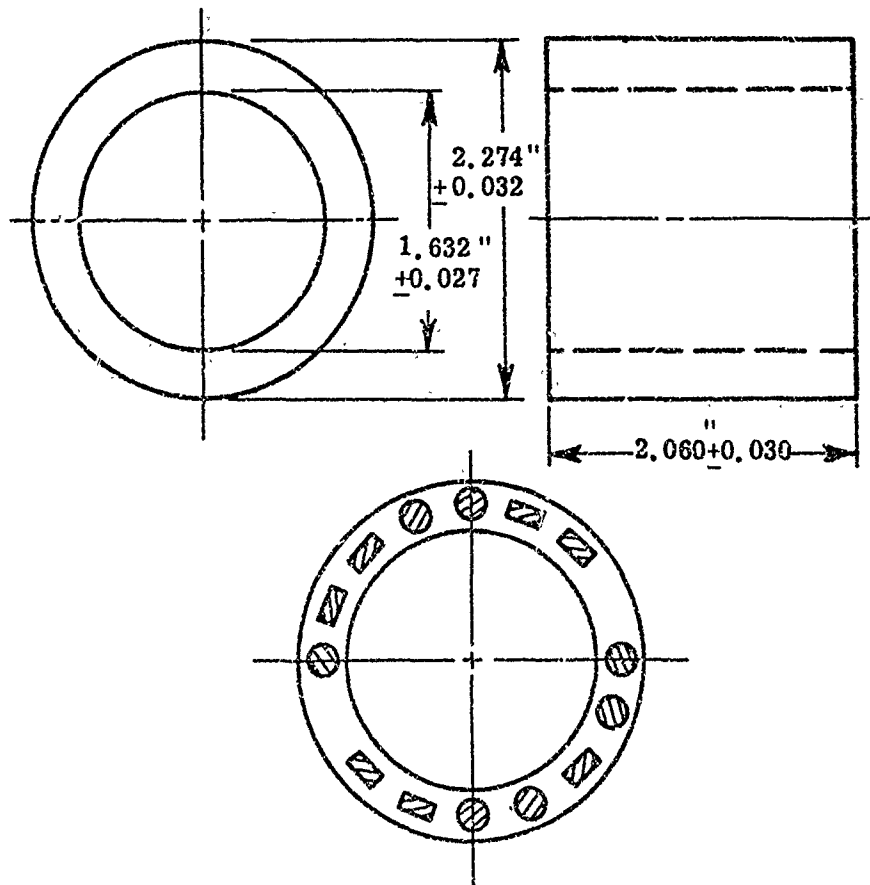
Configuration of Specimen Blar's 6Al7 as Received from Coors and Cutting Plan for Removing Phase I Macro Tensile and Macro Flexural Specimens
